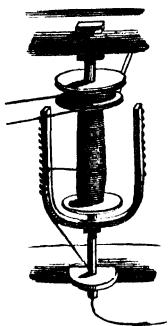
The flier is the Y-shaped body furnished with hooks. It revolves about the common axle, and is driven by one of the wheels shown. The bobbin is driven by the second wheel, which revolves more slowly than the first. The thread from the distaff enters the tubular axis at the bottom of the picture, comes out at a hole just above the bearing, passes to one of the hooks on the flier, and then to the bobbin. The two driving cords from the small wheels go to the big wheel, which is not shown. (*By courtesy of "Chambers's Encyclopædia."*)
